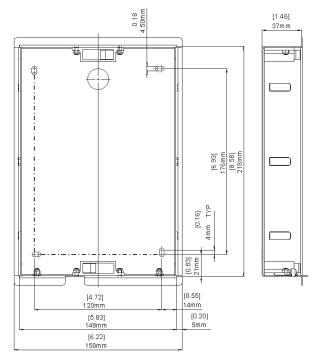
Dimensional Drawing, Recessed Mount Wall Control Unit
